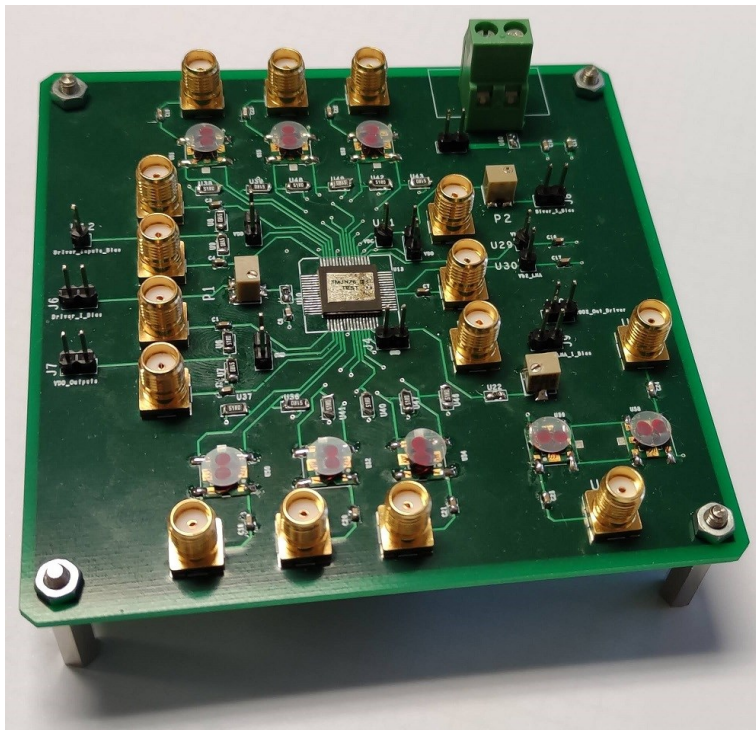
PCB with the prototype test cells, including the output buffer.
